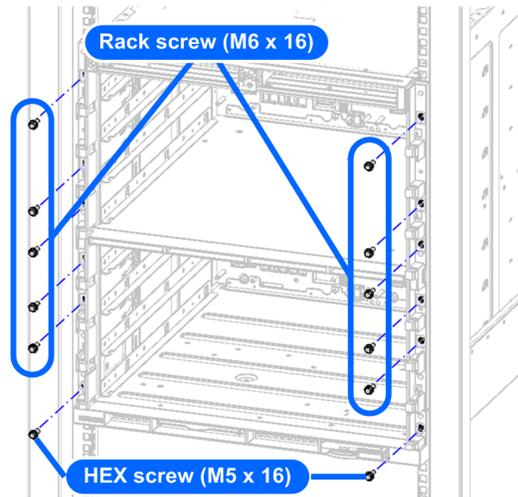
Chassis to the mount angles of the rack cabinet (rack have square holes)
